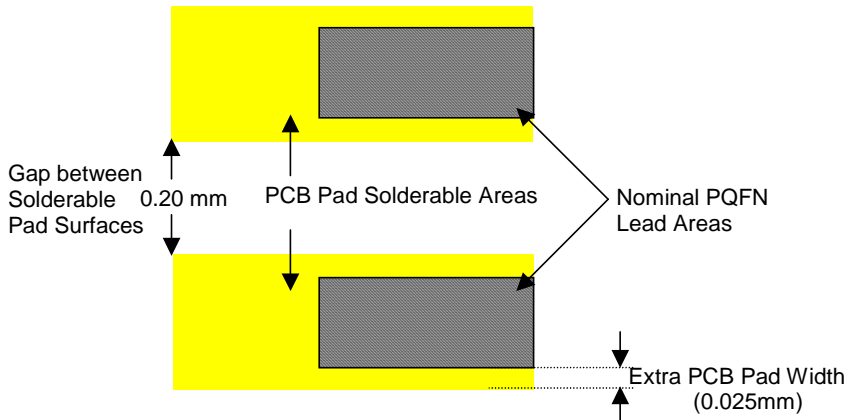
Top View of PCB and Suggested PCB Pad Size for PQFN Leads
